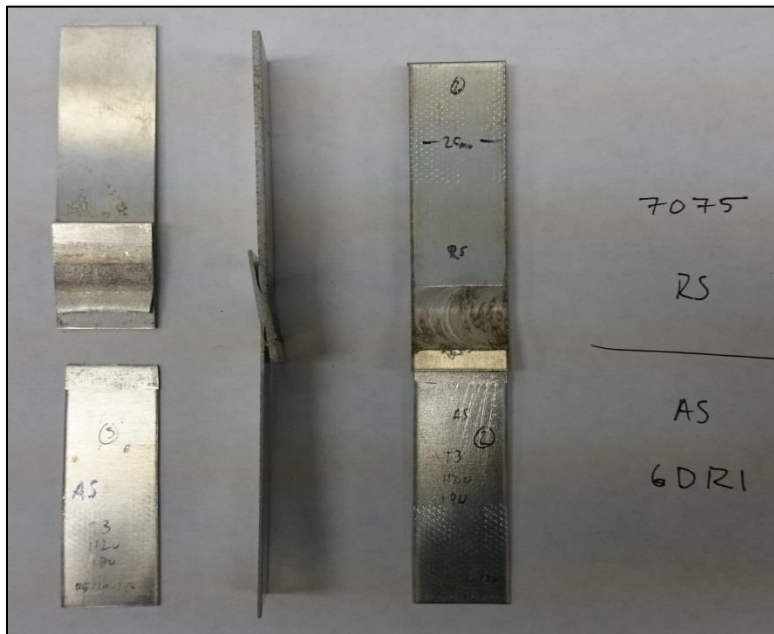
Location of fracture during the lap shear pull tests of post-weld heat treated dissimilar lap FSW of AA7075-T6 to AA6022. The welding condition for all samples is Tool3-180mm/min.
